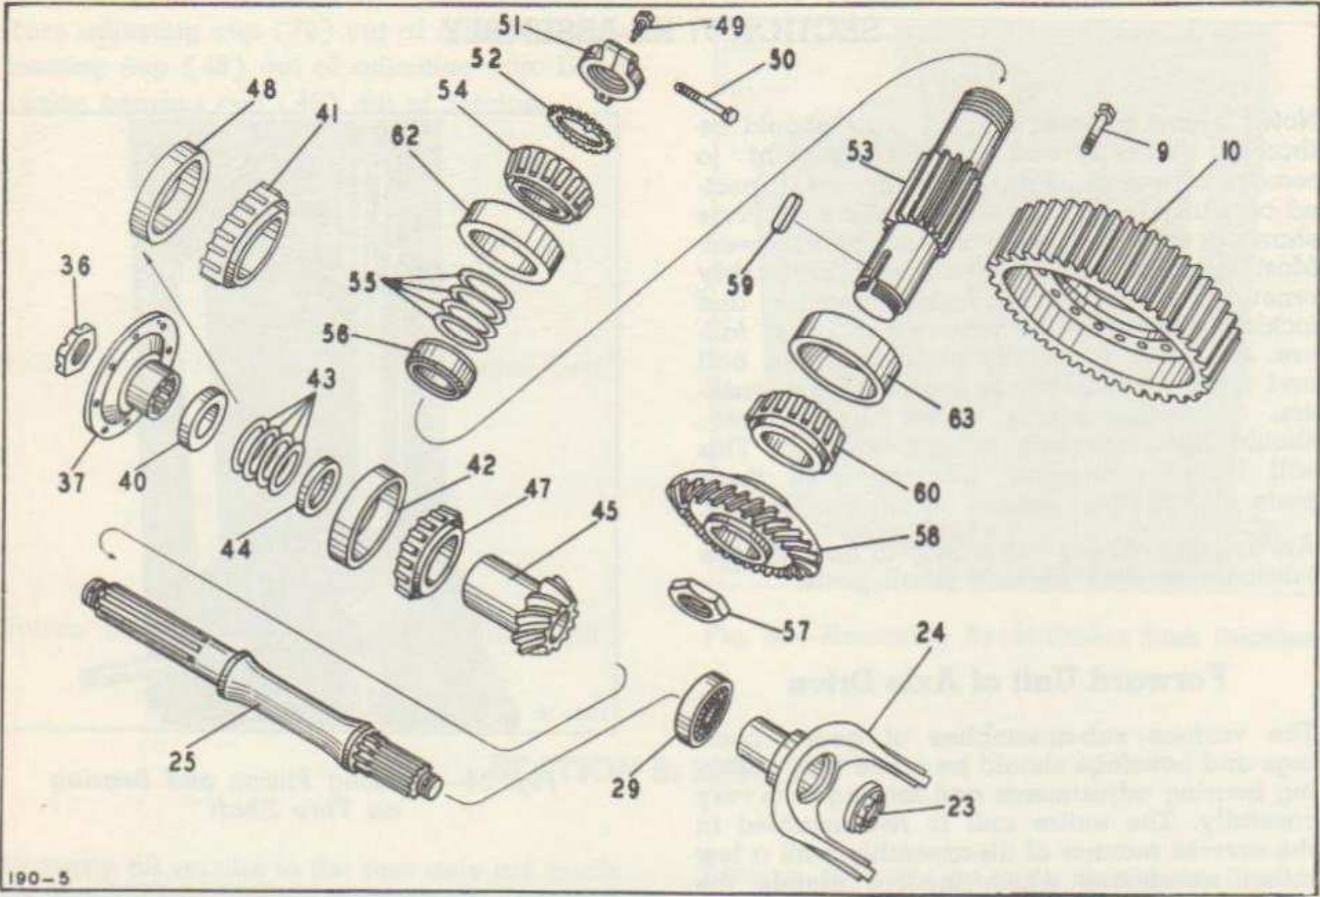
Exploded View of Gear and Bearing Parts of Forward Axle Drive Unit
